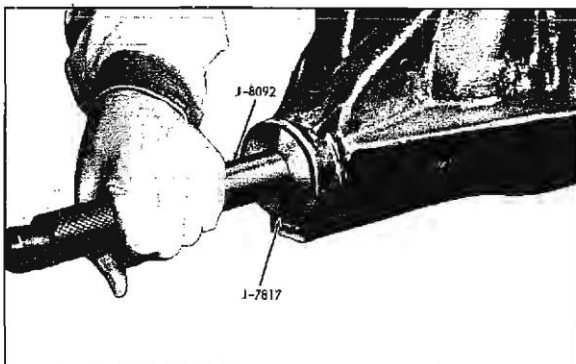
Installing Front Pinion Bearing Outer Race
